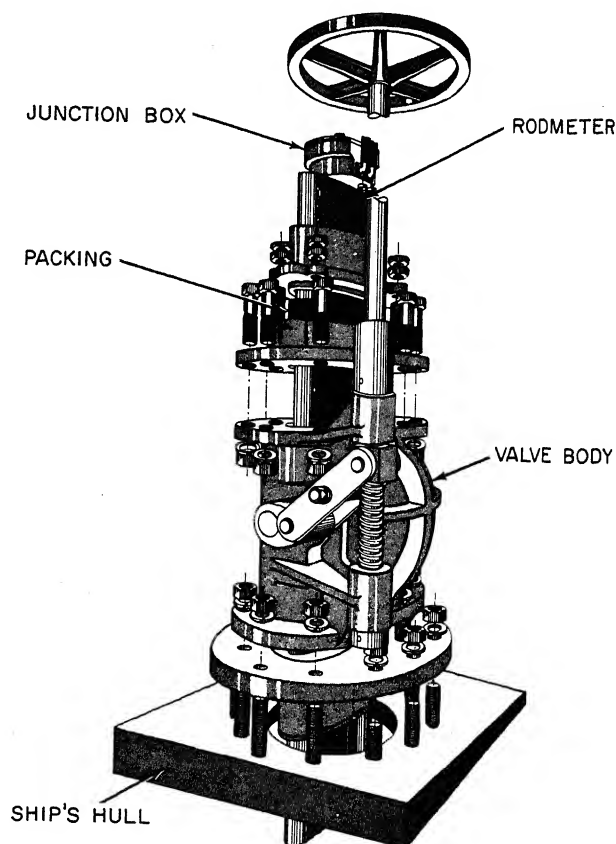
Exploded view of the sea valve and packing assembly with rodmeter installed.
